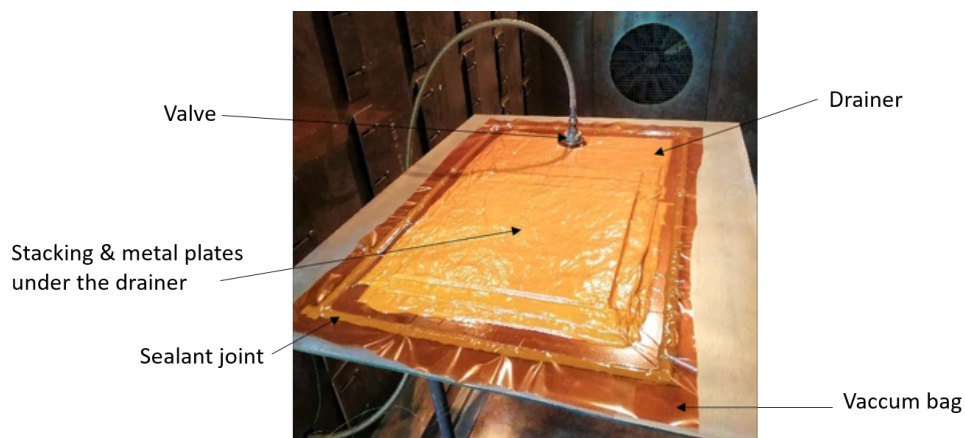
Photograph of manufacturing process after vacuum bagging
